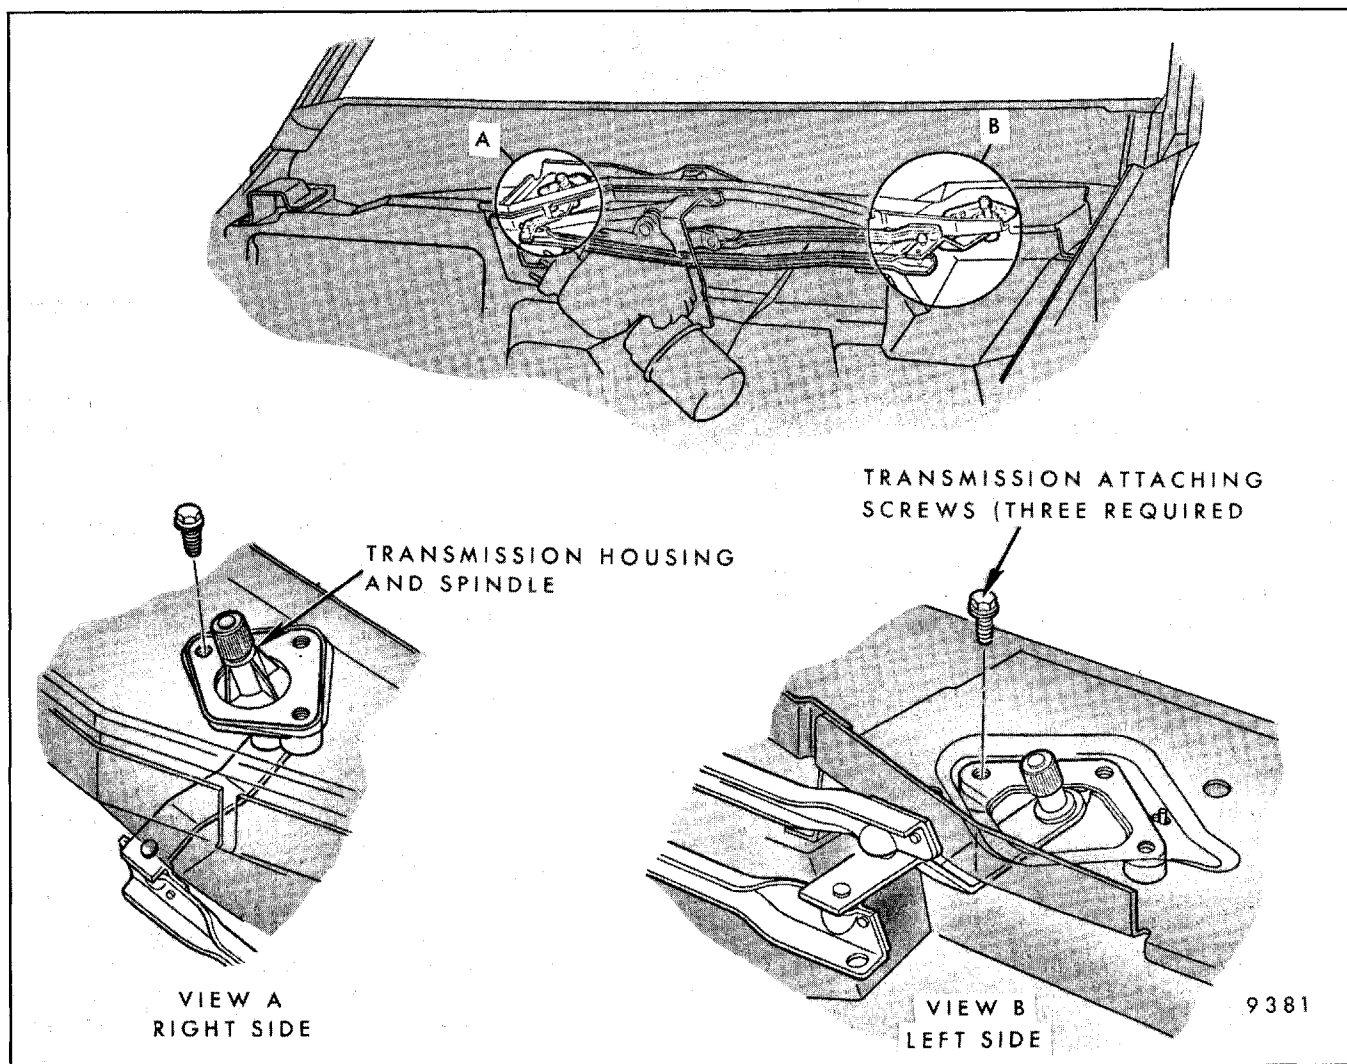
Windshield Wiper Transmission Installation - "B, C, D" Styles
